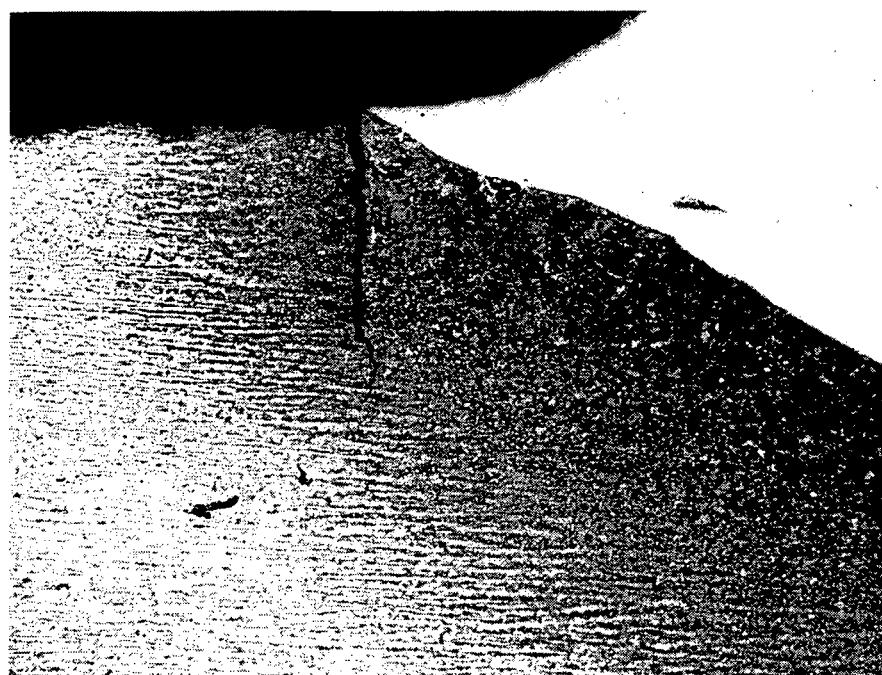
Toe Crack Observed in the Strip Lining Attachment Weld on the 2280-A CS Quarter Panel. InterCorr 2280-19, Magnification 50 × (PN 4466-1)
